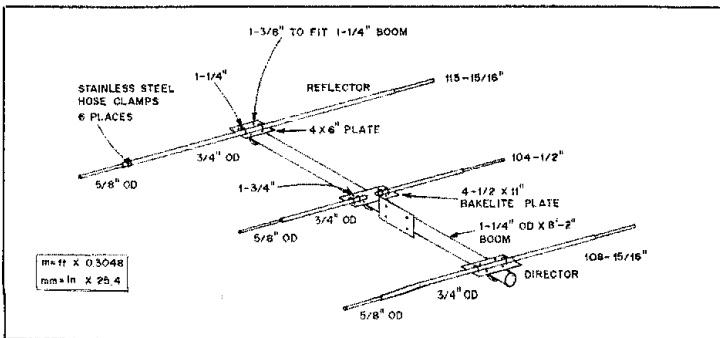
Dimensional drawing of the 3-element, 50-MHz Yagi described in the text.
